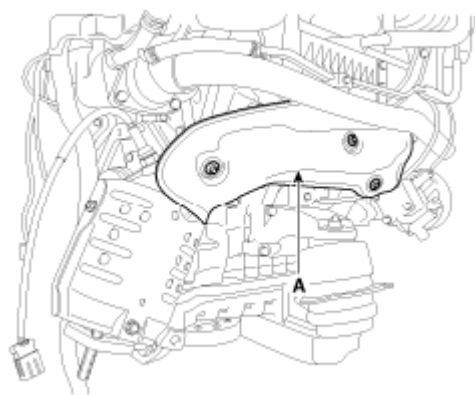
Identifying RH Exhaust Manifold Heat Protector
